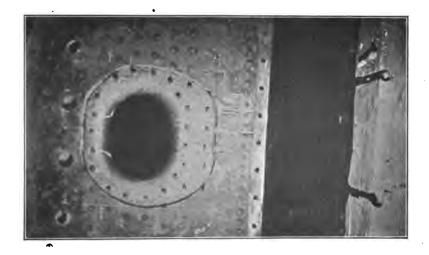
A. C. L. R. R. Waycross shop. Another type of door hole collar fitted to position ready to weld.
